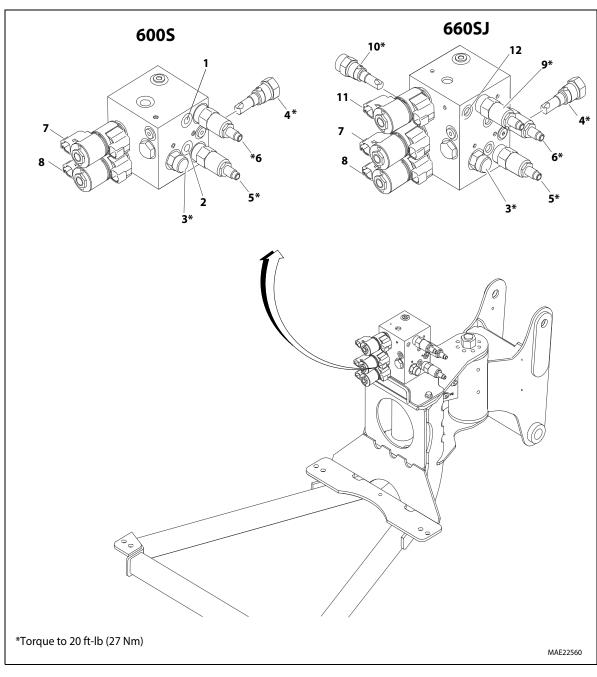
Main Control Valve Block Assembly - 4WS Deutz D2011 and GM Engines (SN 0300181891 to Present), Deutz TD2.9L4 Engines (SN 0300188199 to Present)
